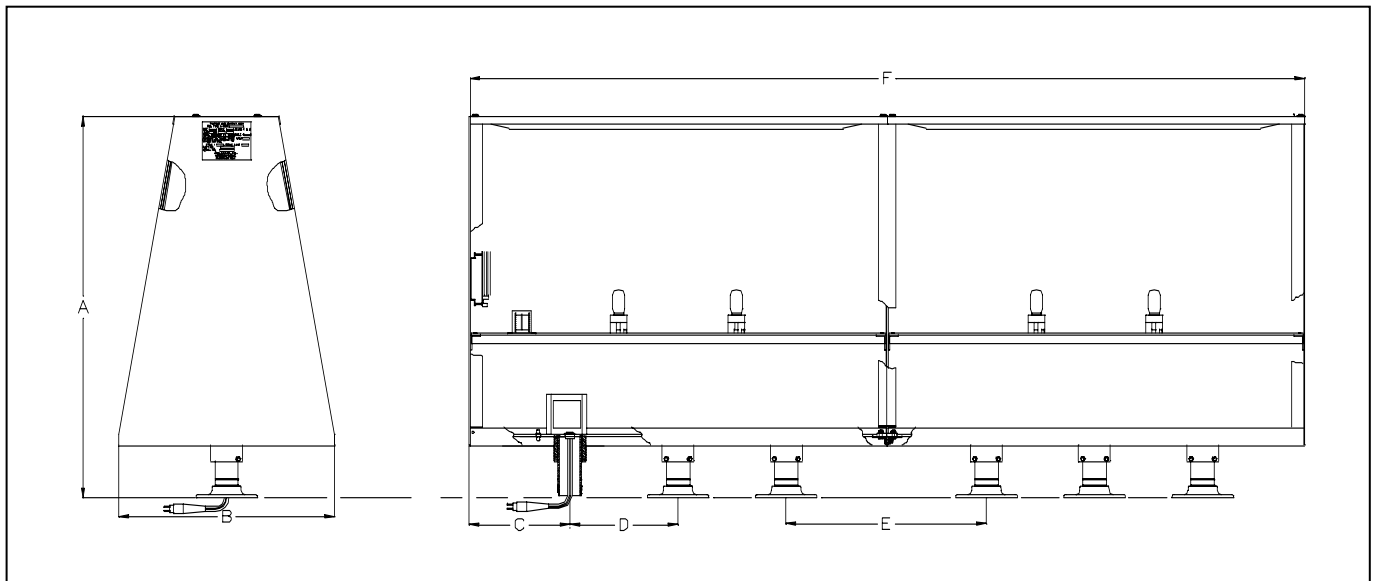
L-858 Low VA Sign Dimensions (Size 3, Two-Module)
